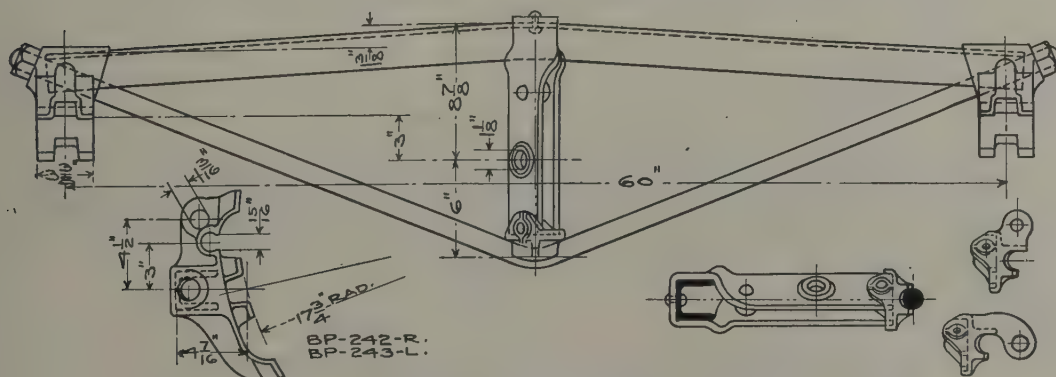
No. 3 Truss Brake Beam. Buffalo Brake Beam Company.
